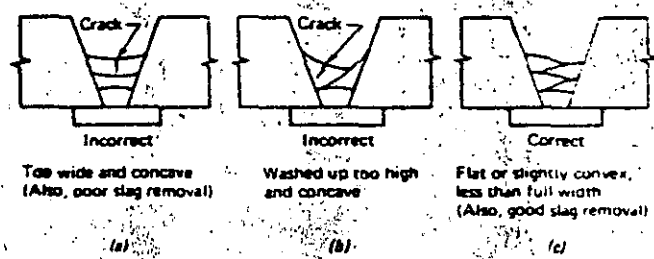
Wide, concave passes (a and b) in a multiple-pass weld may crack. Slightly convex beads (c) are recommended.
